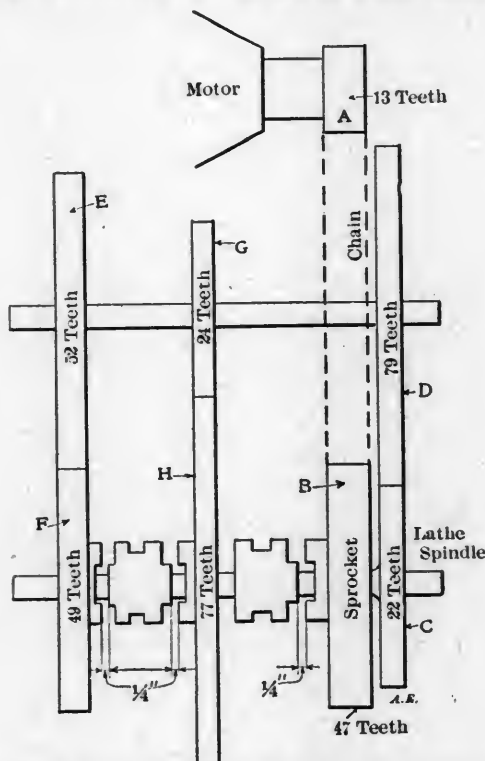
ARRANGEMENT OF GEARING FOUND NECESSARY ON A 25-IN. PUTNAM LATHE.
